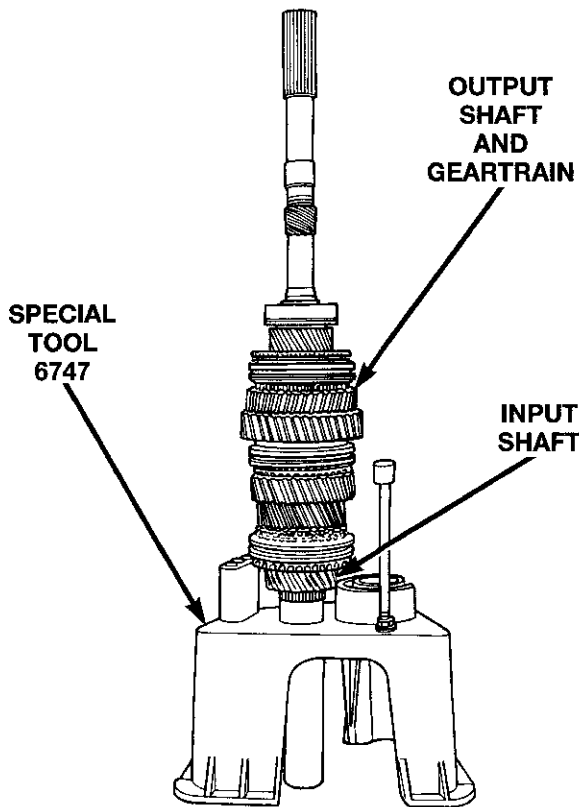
Output Shaft And Geartrain Installed In Input Shaft
